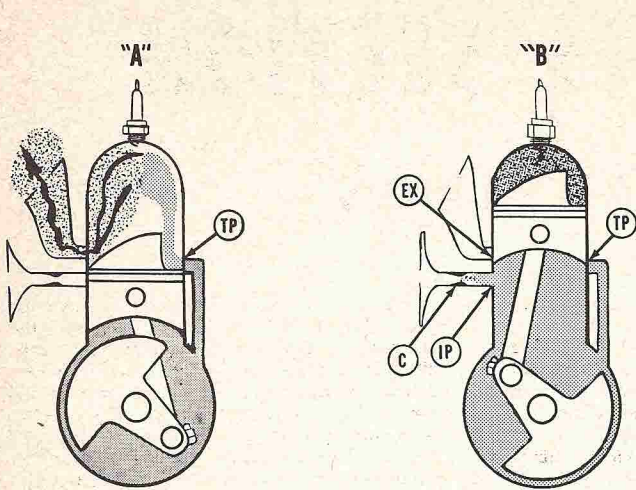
Two cycle, three port engine. Principles are similar to reed valve or rotary valve types except that a third, intake port is located in cylinder wall and opened and closed by the piston skirt.
